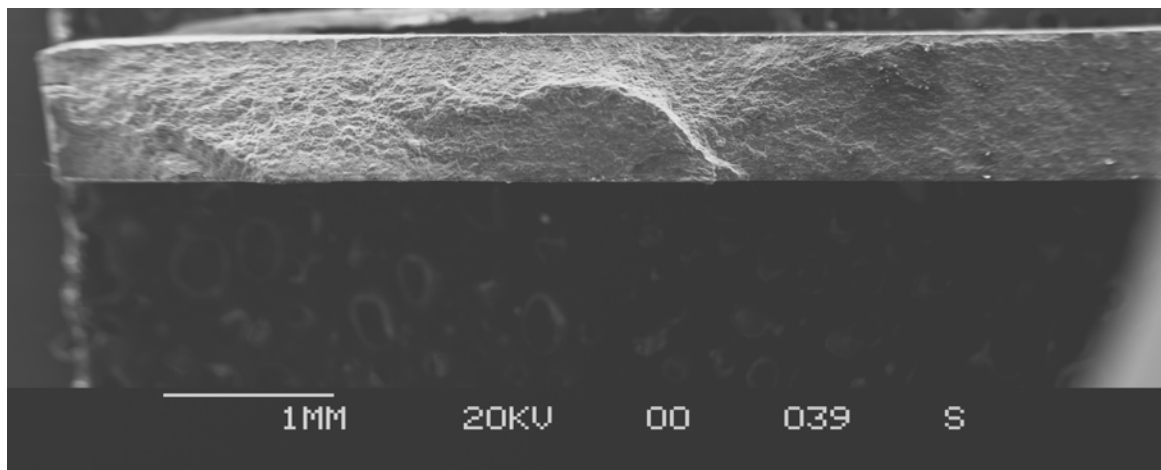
Second Fatigue Crack on Specimen 5878 to the Left of the Primary Crack in Fig. B-39.
